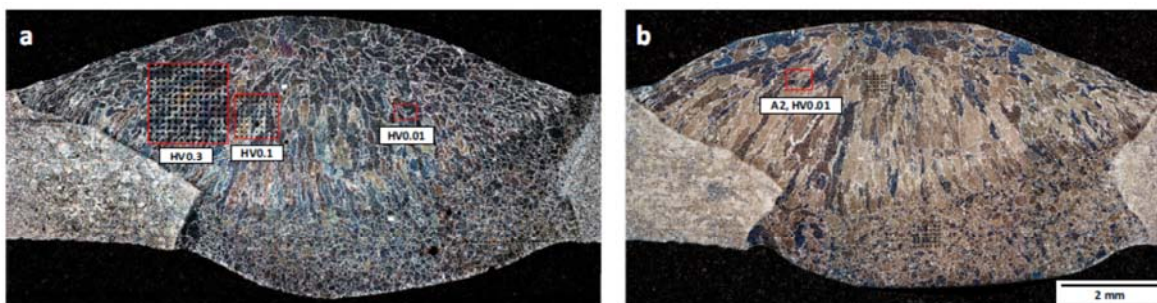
Two macro sections of the arc welded joint CV.2 showing the hardness measurement locations of the heterogeneous weld metal presented in a Fig. 11 and b Fig. 12
